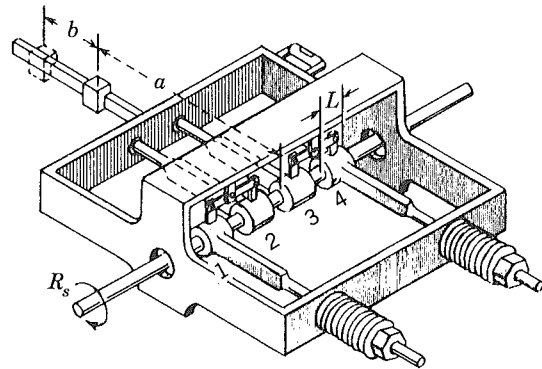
Bearing testing machine of McKee and McKee (1929). From Norton (1942), *Lubrication*, McGraw-Hill.
